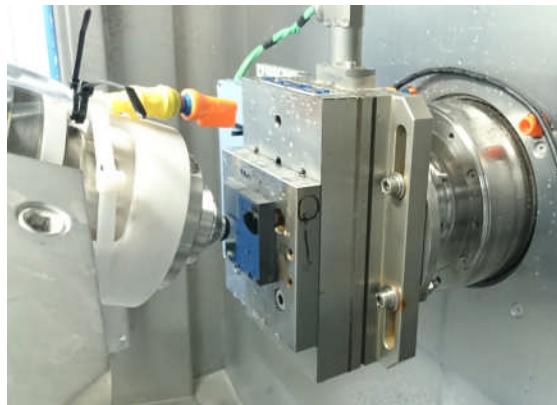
Dynamometer and SAG tool mounted inside the CNC machine
